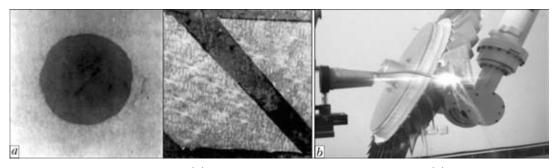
Laser drilling for turbine blades (a) and laser peening for compressor blades (b)
